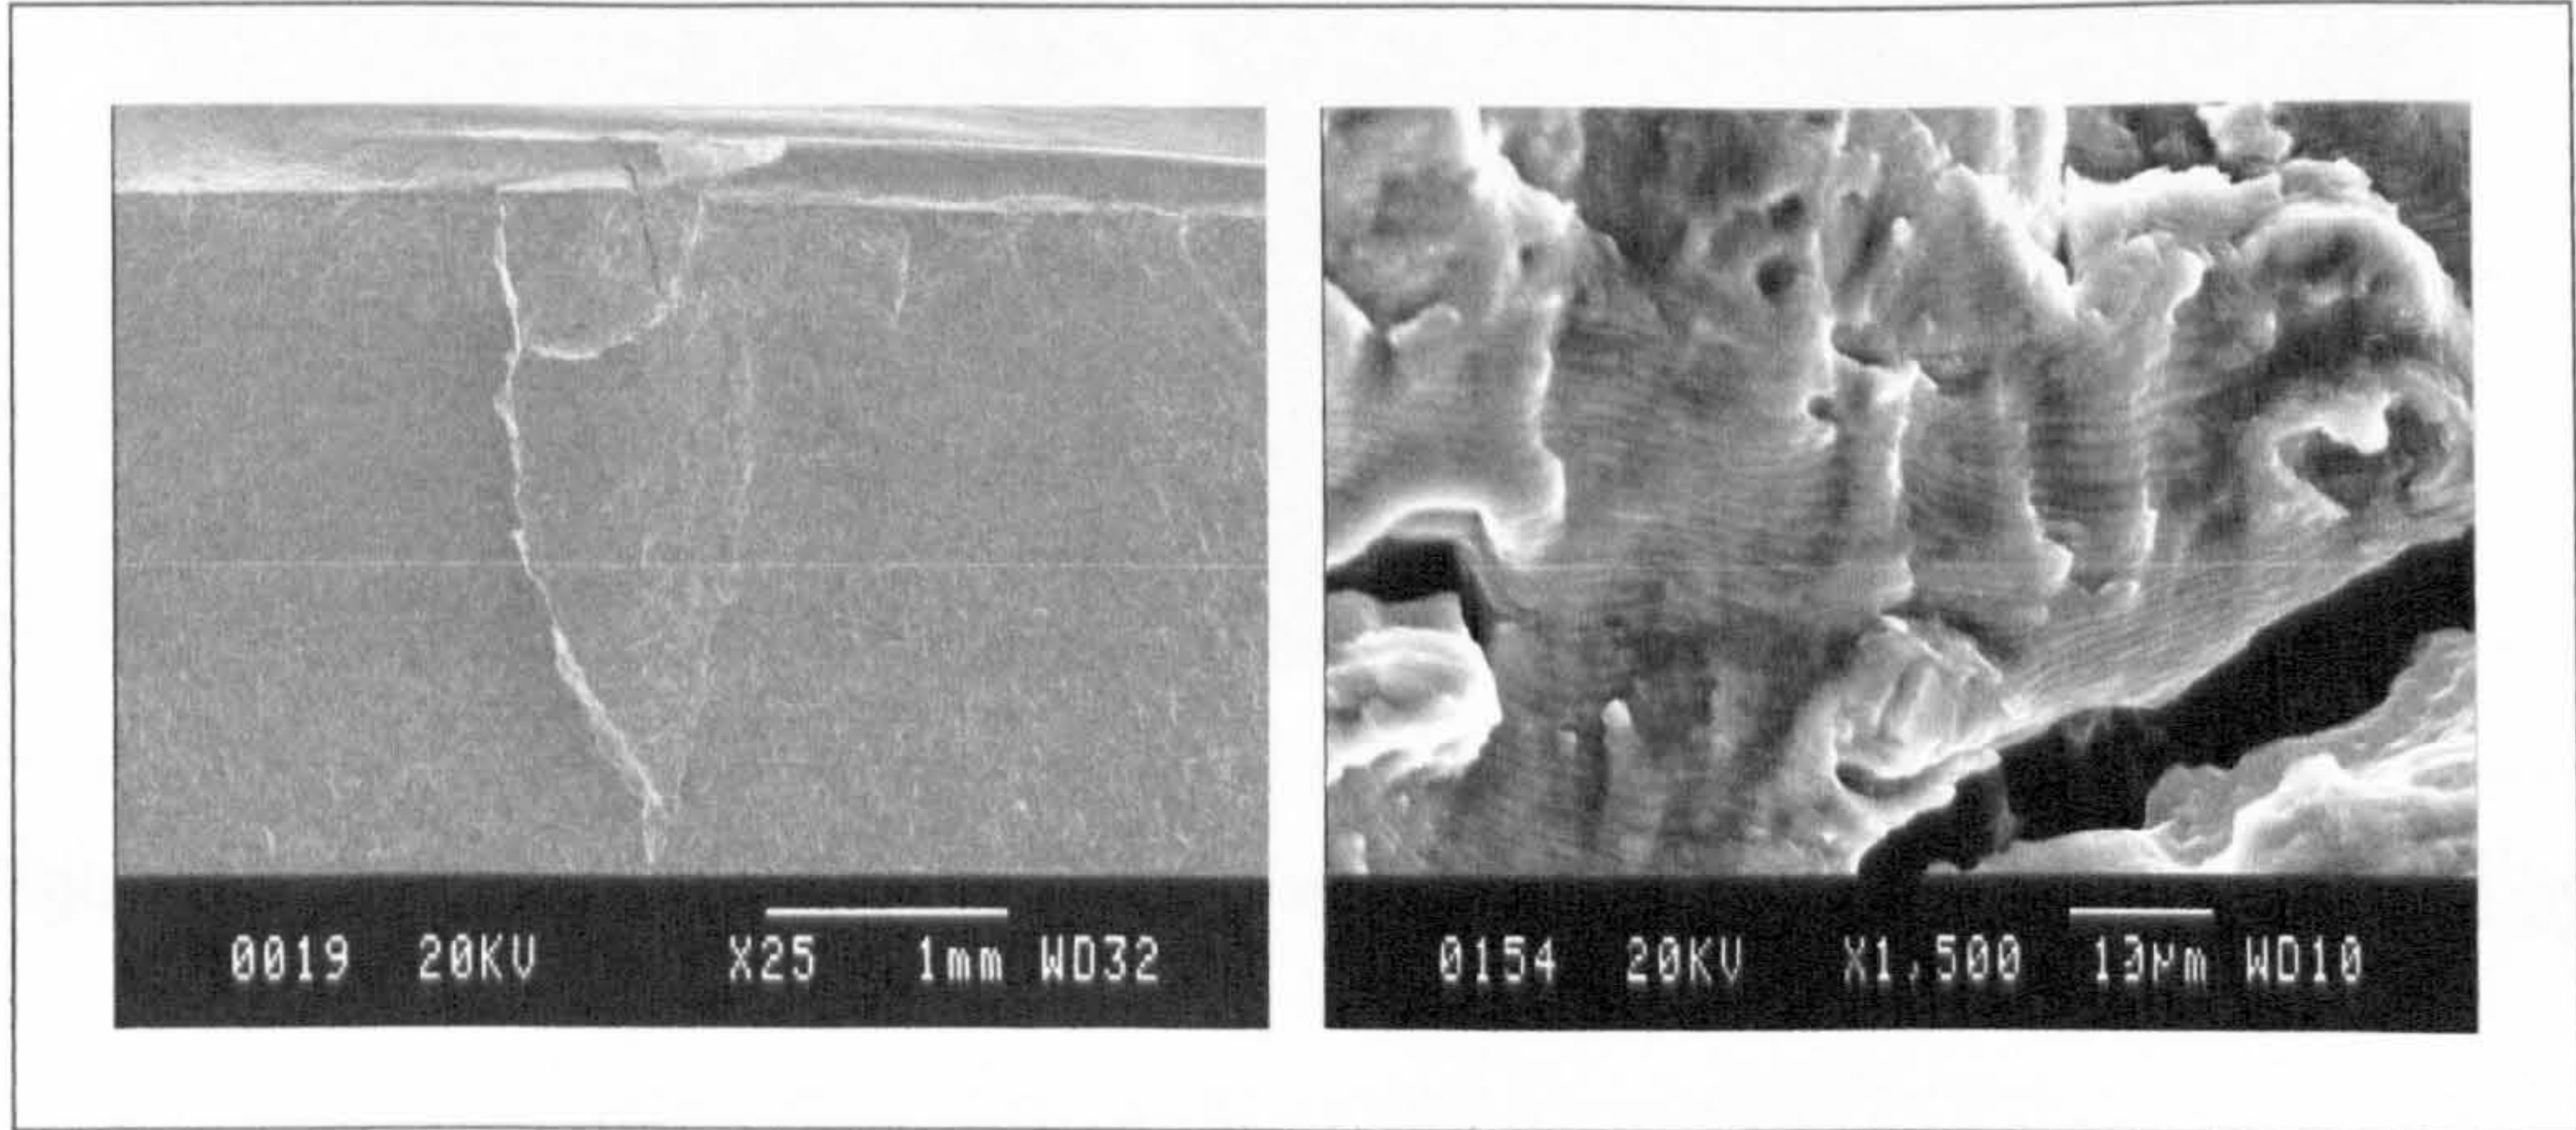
Fatigue crack initiation and coalescence (left), fatigue striations and secondary cracking (right), (MIG HI 2).
